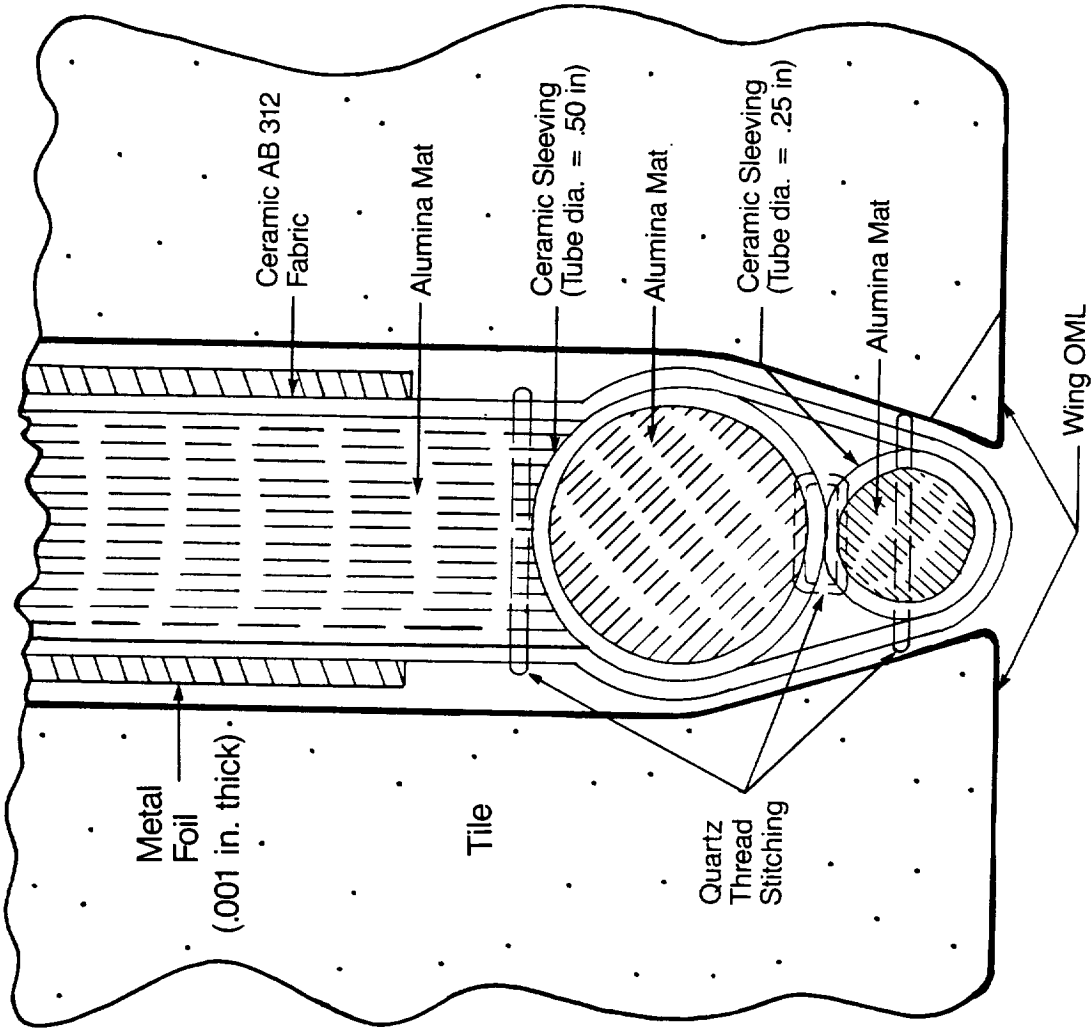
Detailed view of a wing leading edge, sleeved (captive) gap filler.
